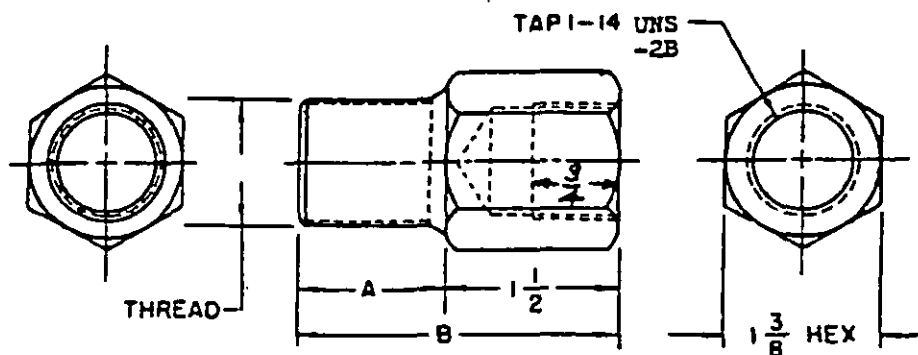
Type XIII, class 1, style B puller adapter, mechanical, gear and bearing, male and female thread with 1-14 UNS-2B tapped hole.
